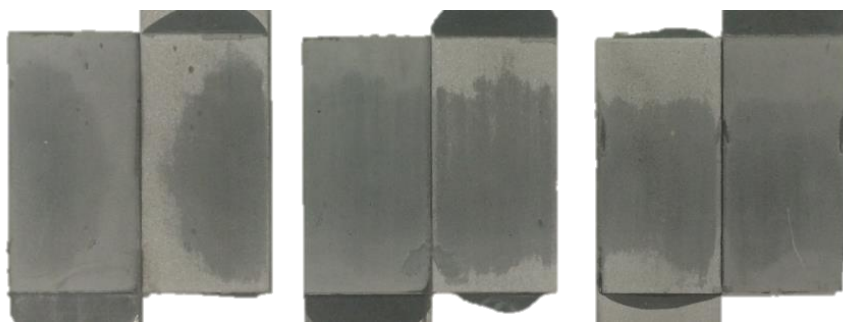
Failure modes of CFRP (2.1 mm)/HSS (2 mm) 50 mm overlap SLJs tested specimens
